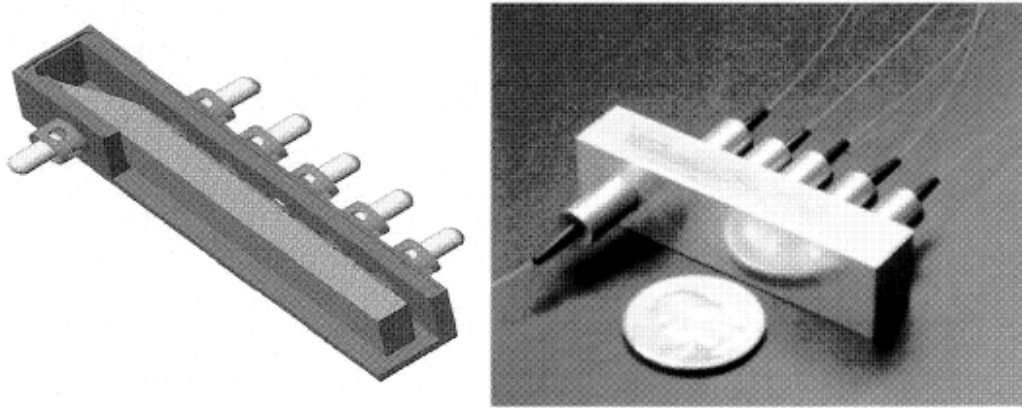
A packaged polymer coarse WDM photonic interconnects (right) and its assembly drawing (left) [35].
